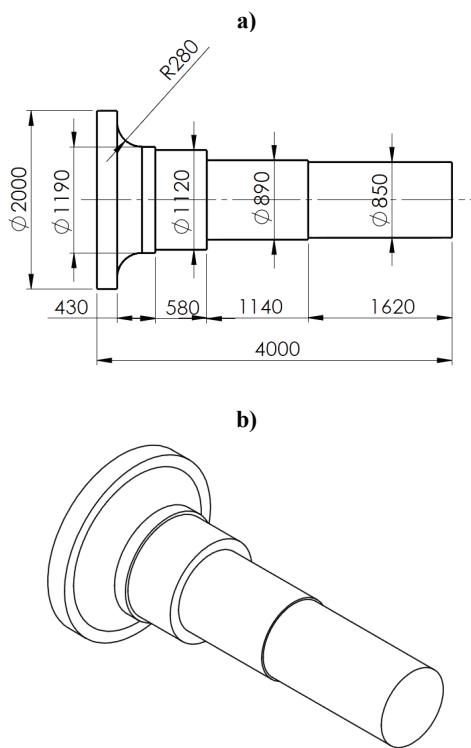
Windmill main shaft: a) dimensions, b) isometric view.
